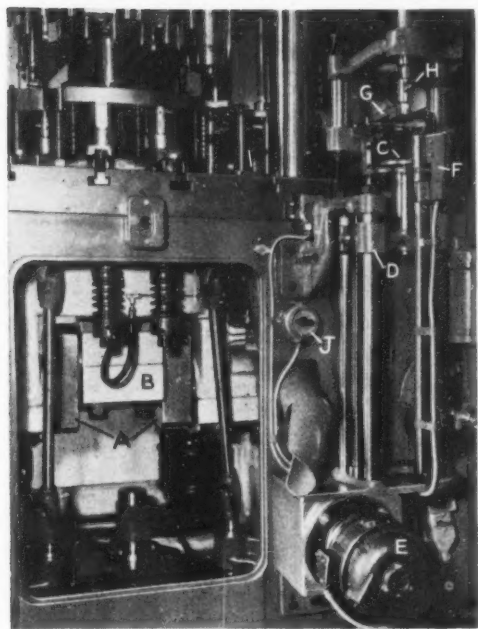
A Vertical Magazine Unit for Feeding Flat Blanks to One of the Side Stations of a Rotary Transfer Press. The Magazine Elevating Mechanism is Driven by a Separate Motor
